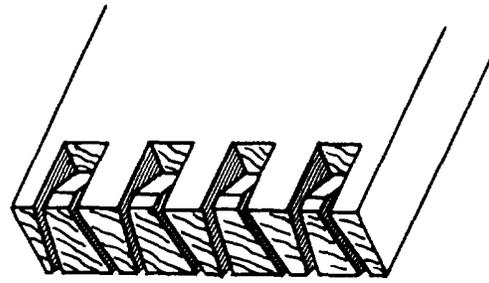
Chiseling out waste in a through-multiple-dovetail joint.
